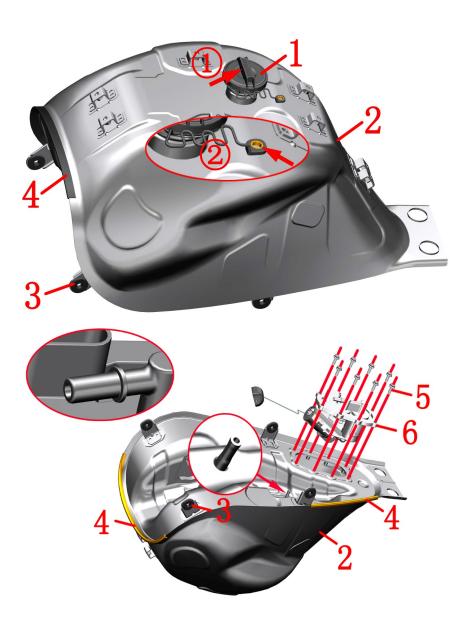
FUEL TANK LINER		Bile in the fuel tank	CHK	(2)
